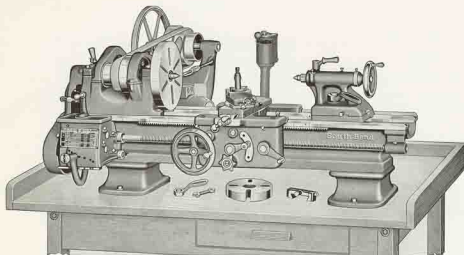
Cat. No. 411-A, 11" x 6" Series "R" Quick Change Gear Horizontal Motor Drive Lathe complete as shown.....\$483.00
